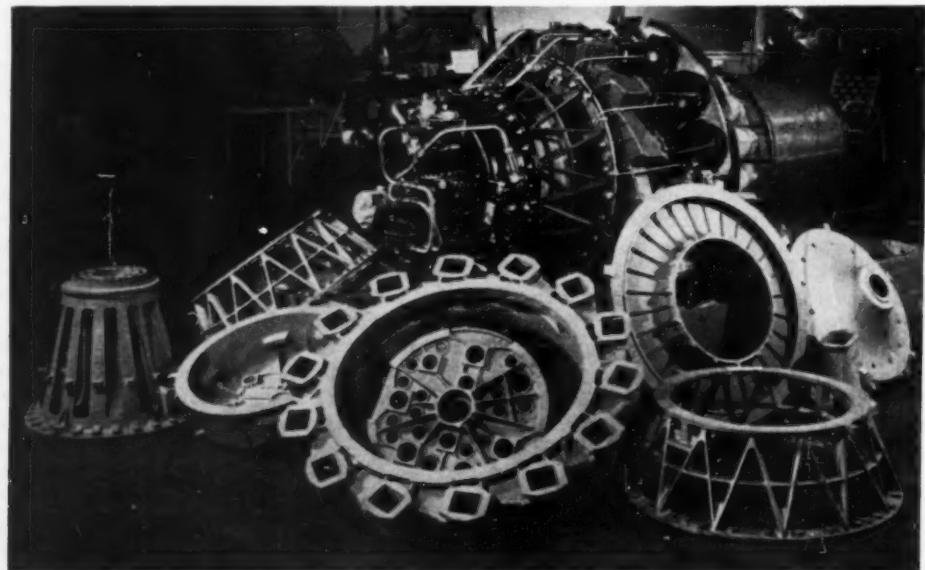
ALLISON TURBOJET ENGINE AND PRINCIPAL MAGNESIUM CASTINGS USED IN THE CONSTRUCTION
